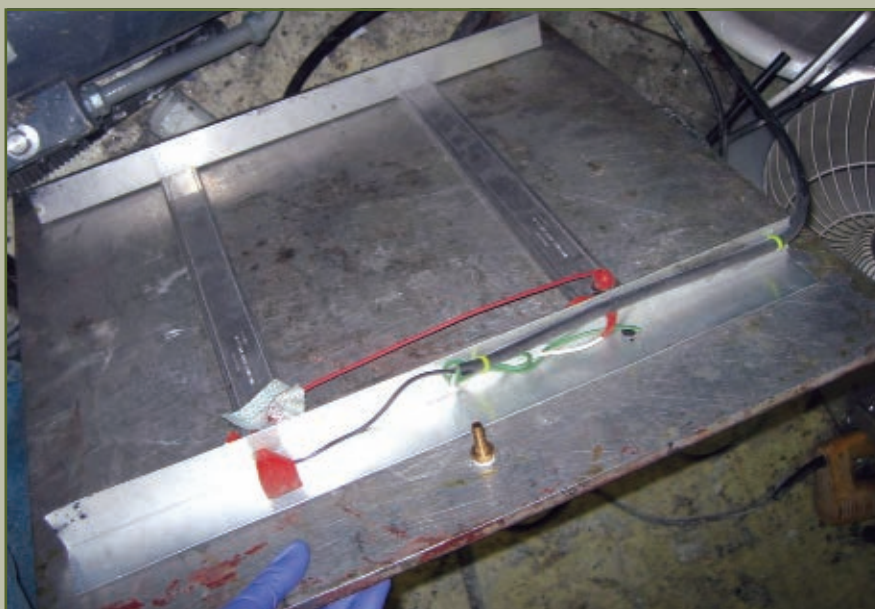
TTT's aluminum mold plate with two heating bands and hose connection barb for easy vacuum bagging.
